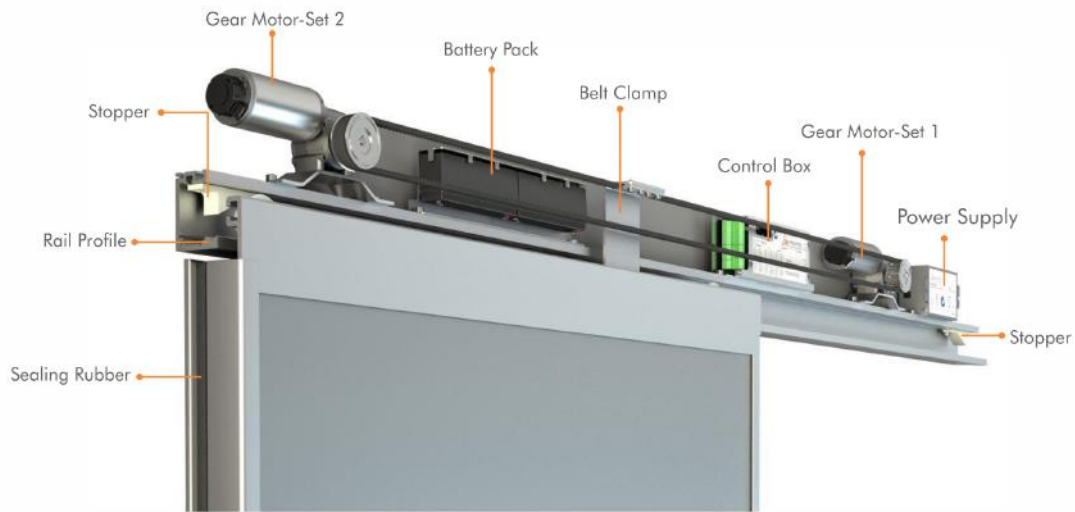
Inner mechanism of a hermetically sealing sliding door, [22]
